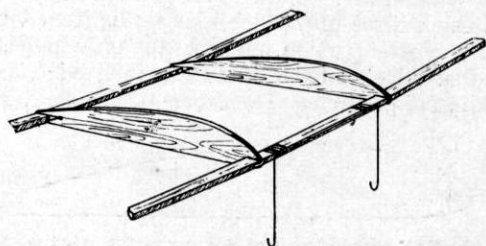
Centre Section of Wing. Note wire saddle (illustrated only on front spar) for attaching wing to fuselage with Rubber Bands.
